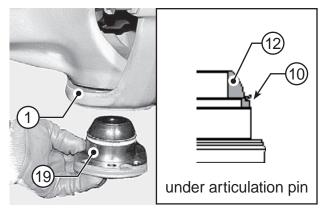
Fit the unit (19) in the steering case (1). Position the screws (15) and tighten securely.
